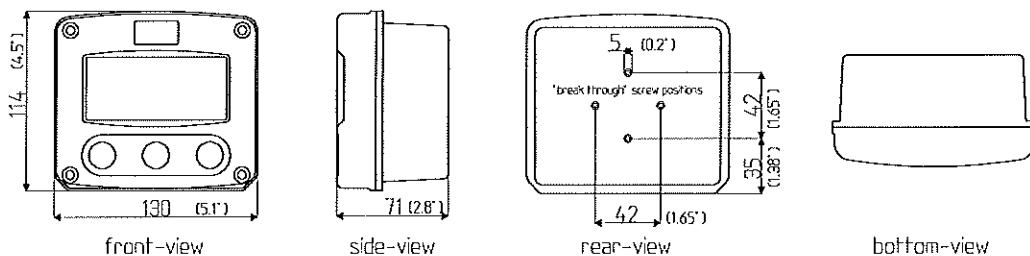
Dimensions of type HD - IP67 ABS Wall-mount enclosure.
